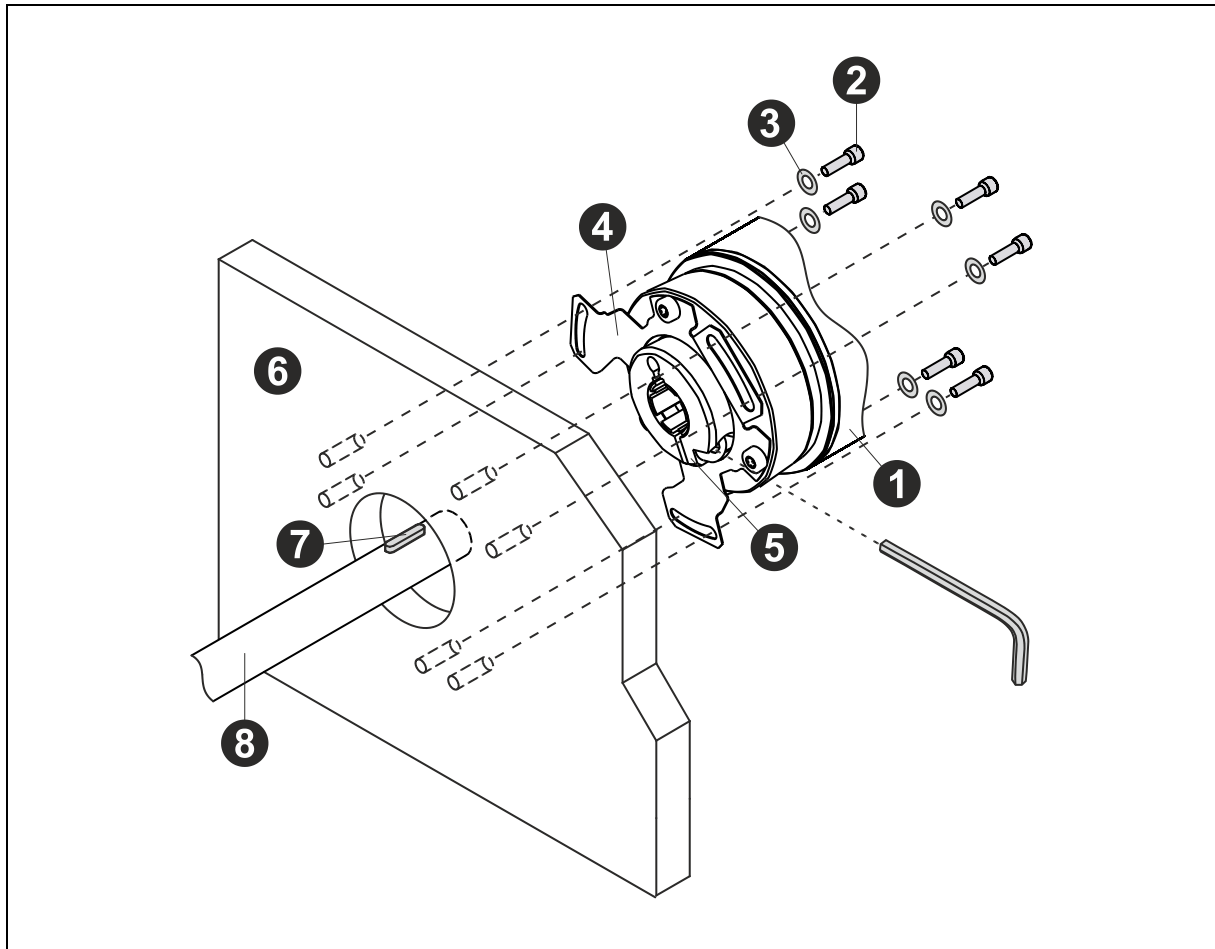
Assembly with torque arm (spring steel sheet), illustration showing the principle
